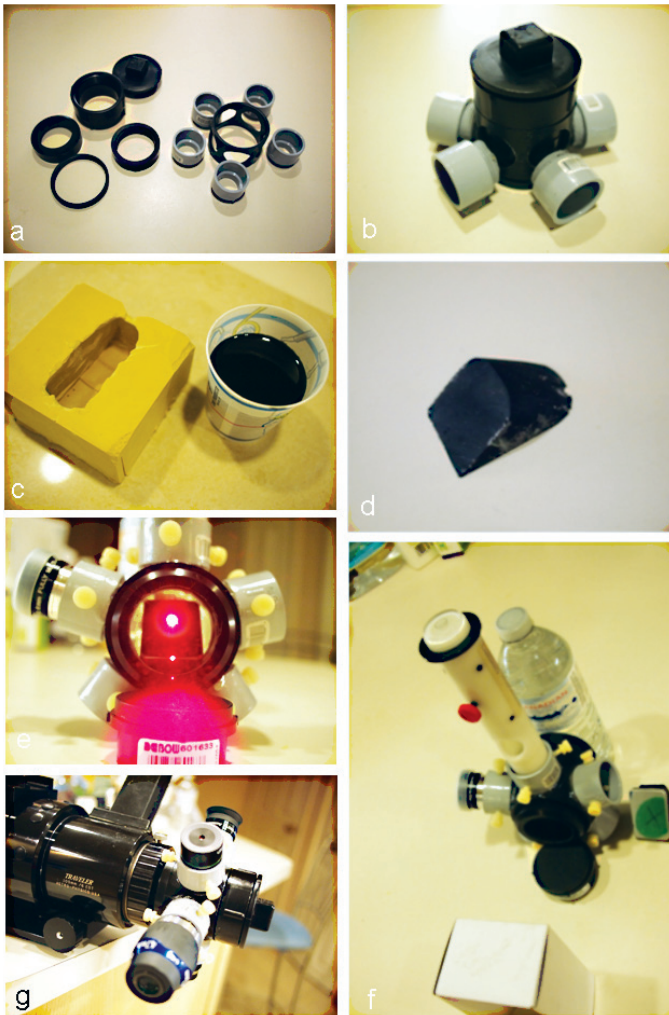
Fabricating an eyepiece turret: a) the ABS rings; b) the assembled eyepiece turret; c) preparing the mold; d) the molded mirror support; e & f) laser collimation; g) the eyepiece turret in use.
